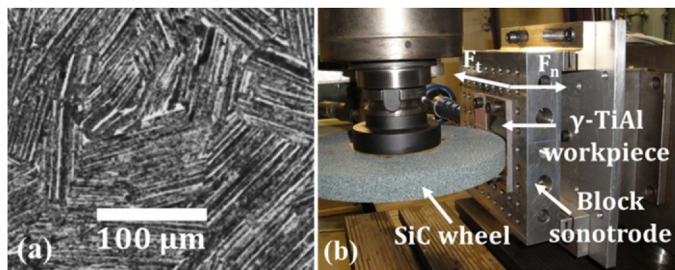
(a) Microstructure of γ -TiAl; (b) wheel-workpiece-sonotrode assembly and force directions.
